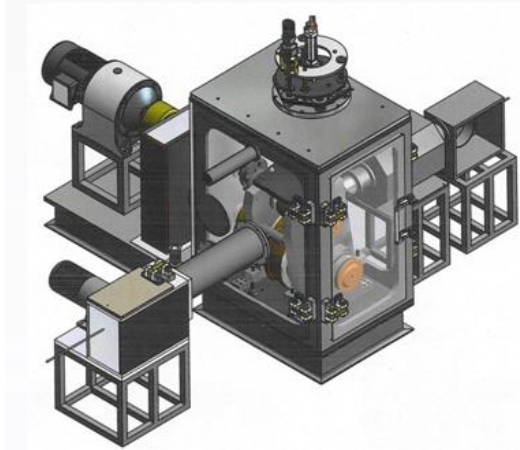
Schematics of hybrid alloy sheet fabrication machine
